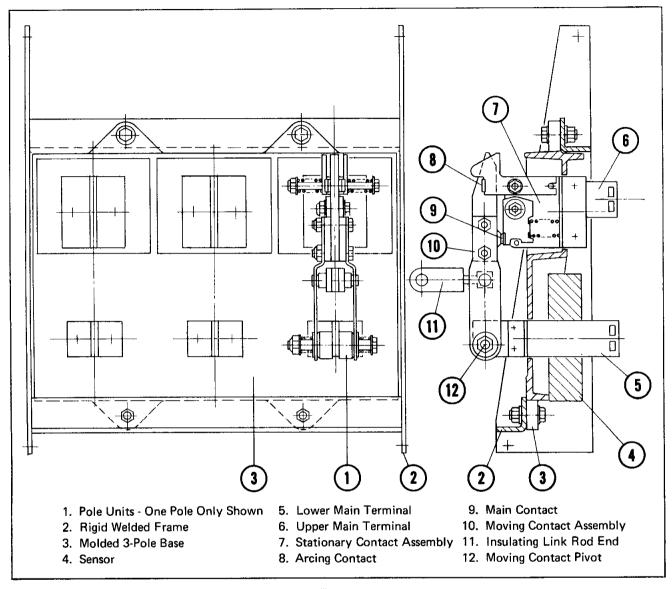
Three Pole Assembly of DS-206 Pole Units on Frame
